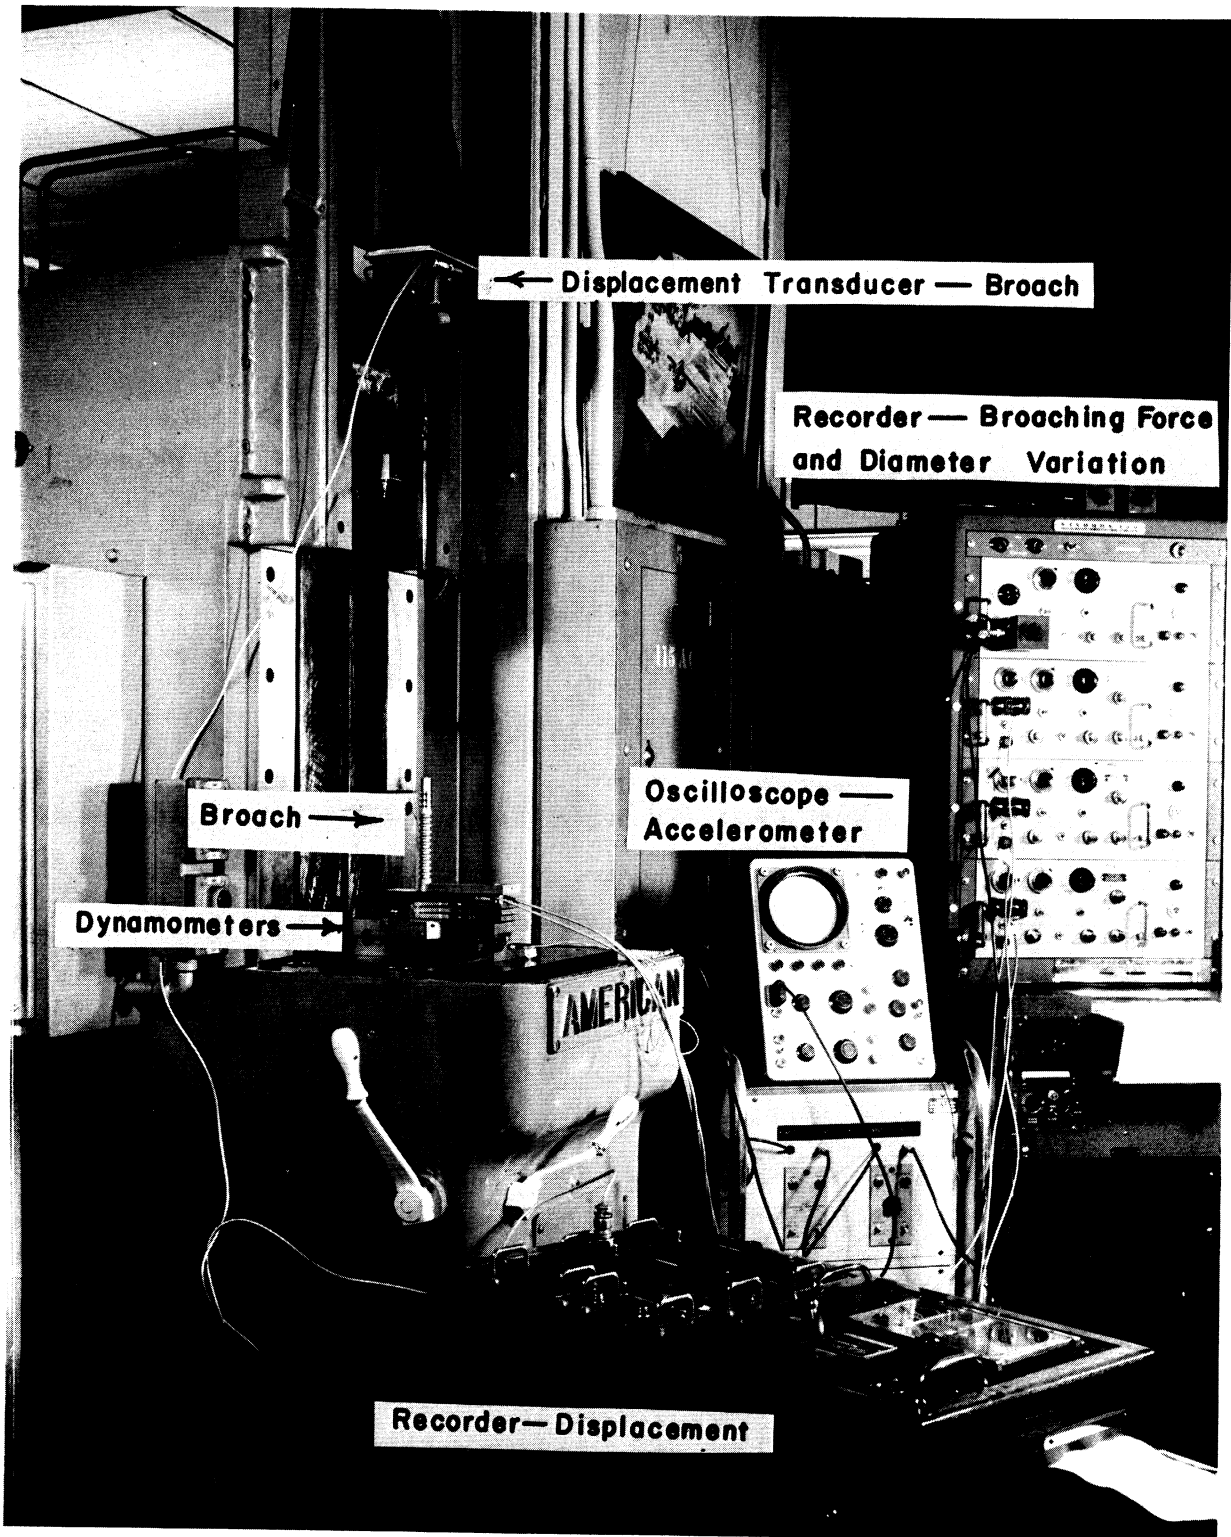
Photograph of broaching setup showing equipment and instrumentation used.
